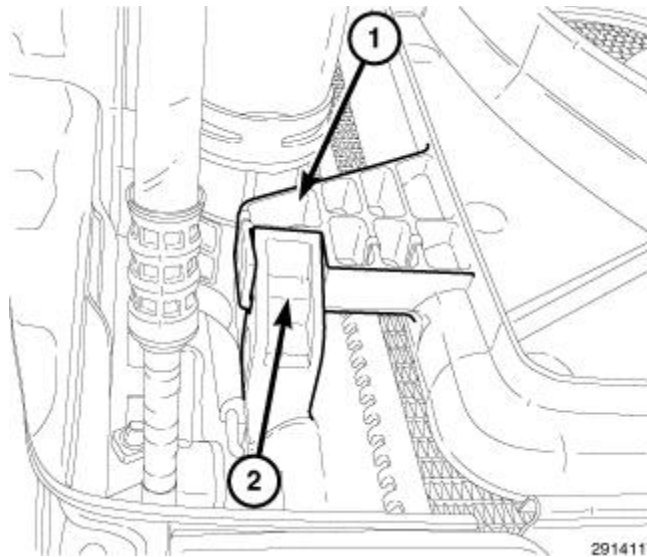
Radiator Cooling Fan Assembly & Radiator Mounts
